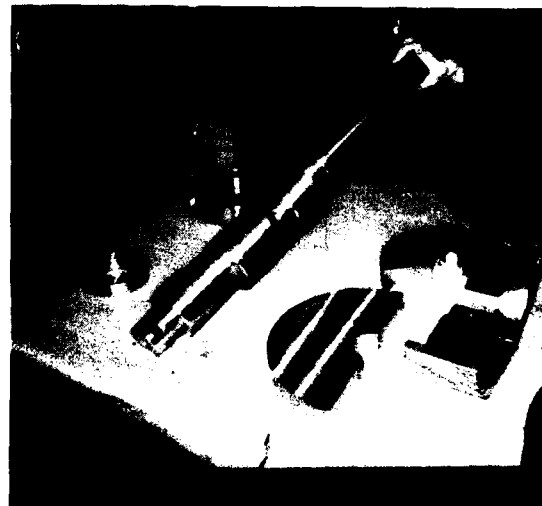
Photograph of crankshaft and other parts during construction of expander.
